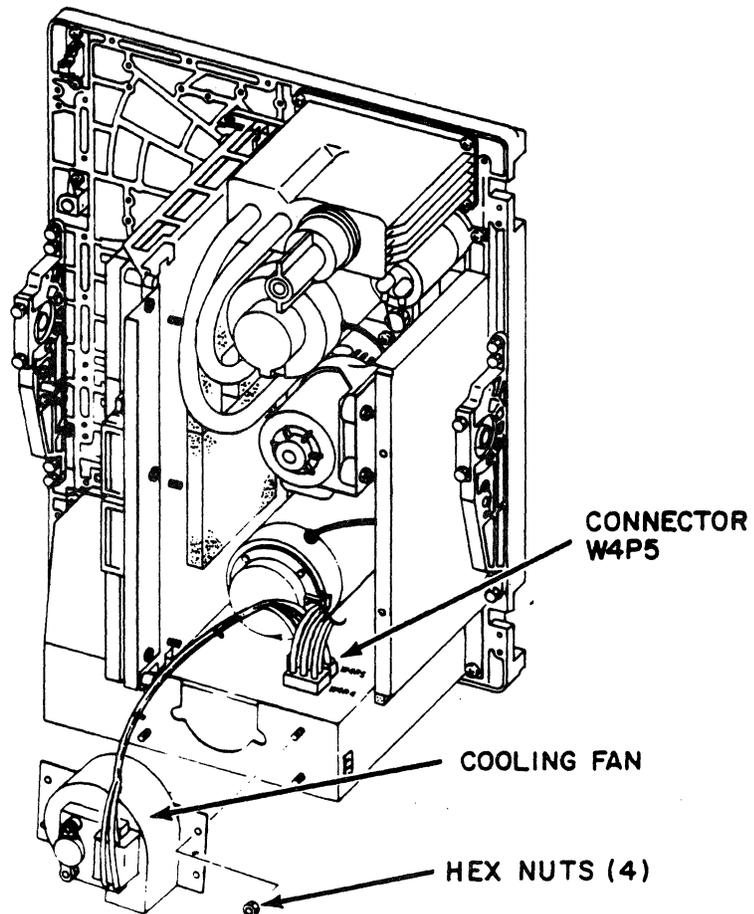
COOLING FAN ASSEMBLY 02A01-84
